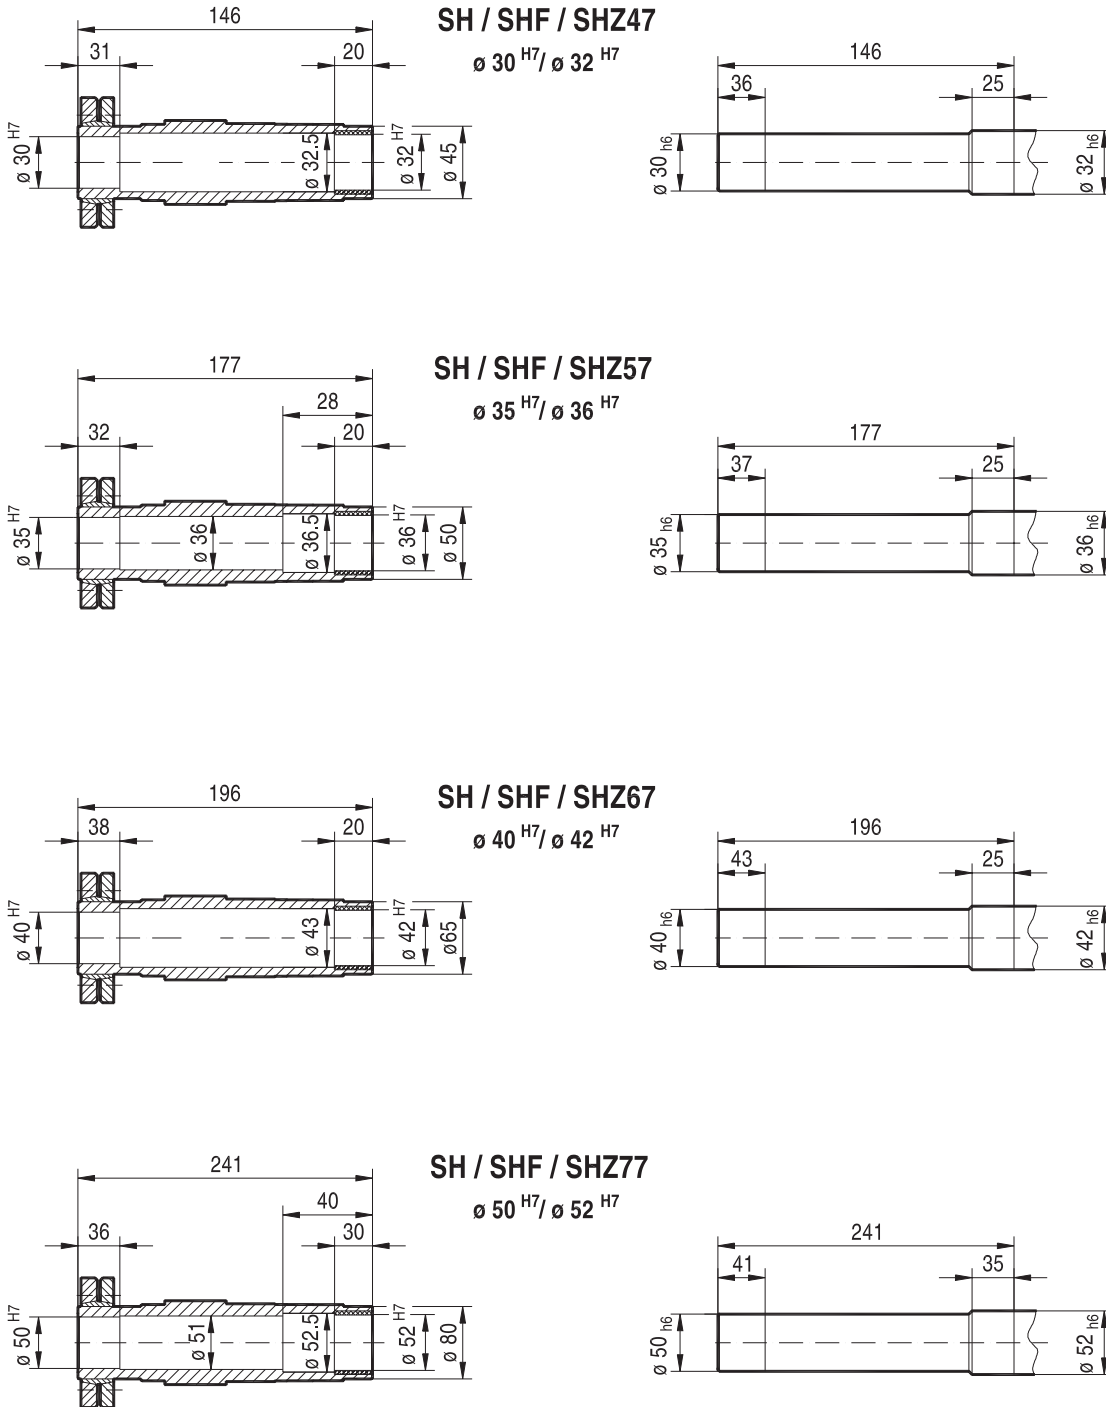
Shouldered hollow shaft SH/SHF/SHZ47...77
